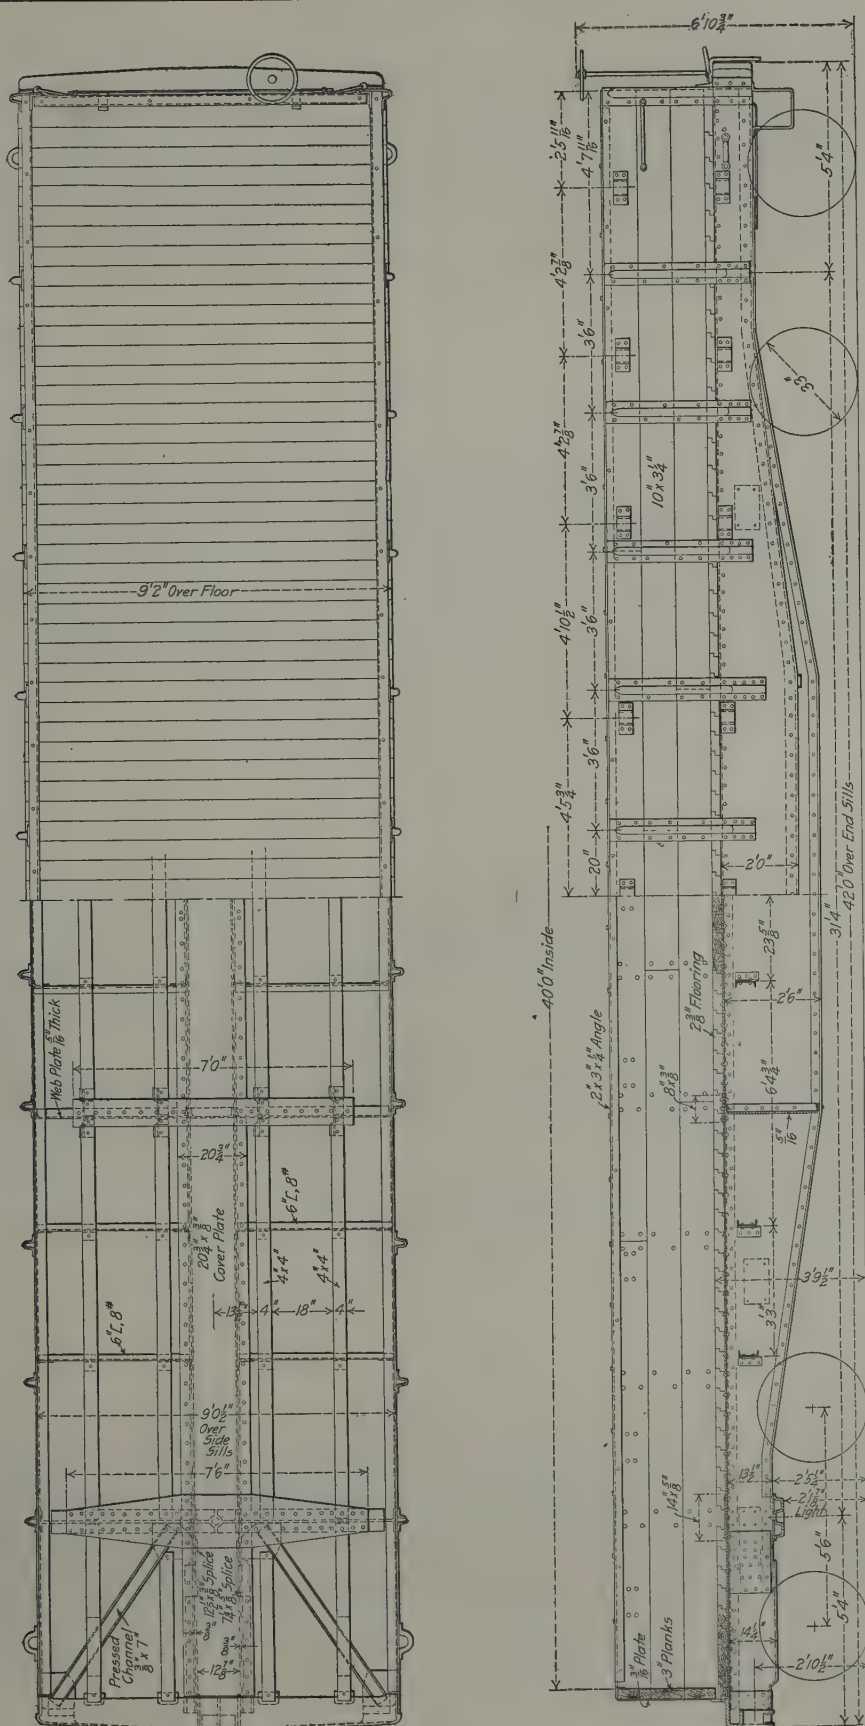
Central Railroad of New Jersey Steel Underframe 50-Ton Capacity Gondola Car. See Also Fig. 102. Builder, American Car & Foundry Company.
